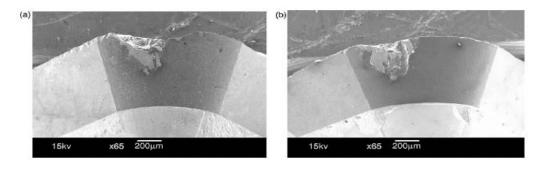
Flank of cBN tools: (a) Dc= 0.125 mm, (b) Dc = 0.075 mm
